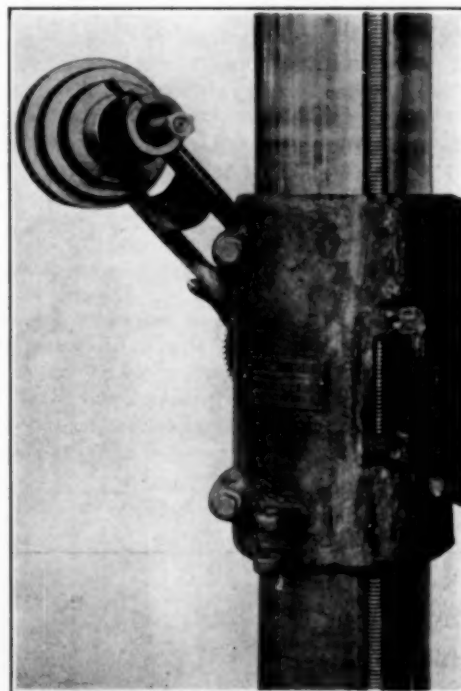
SAME AS FIG. 4 AFTER HAVING BEEN WELDED—DRILL
